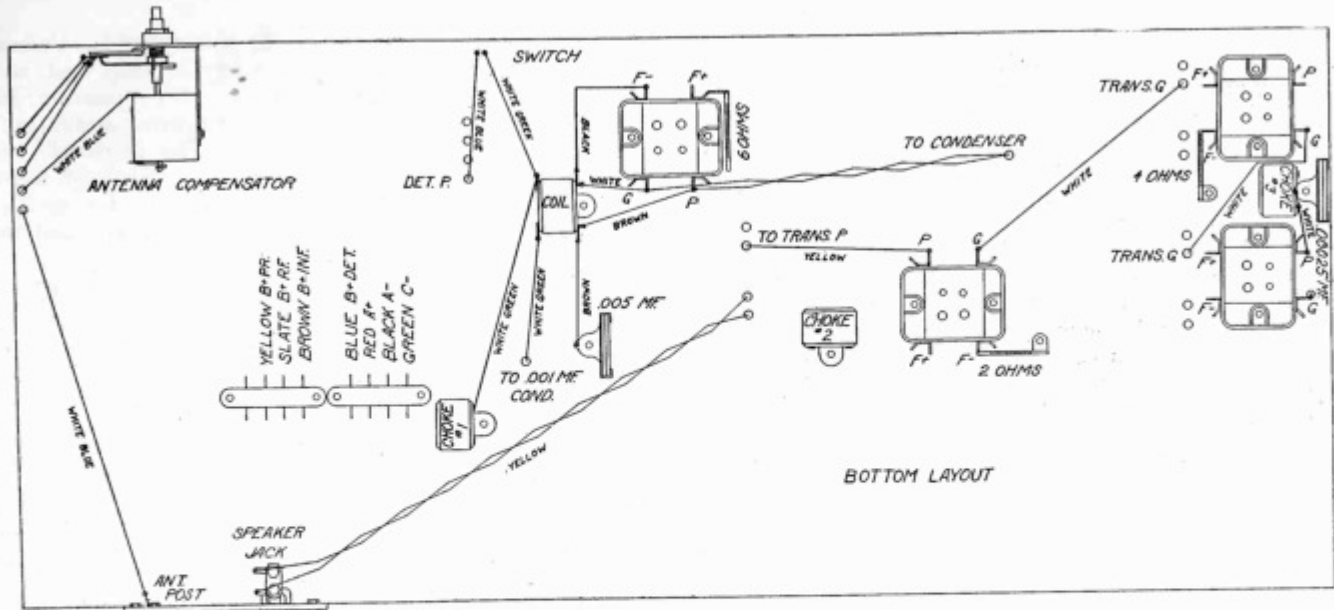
Arrangement of Parts on Bottom of Steel Base
